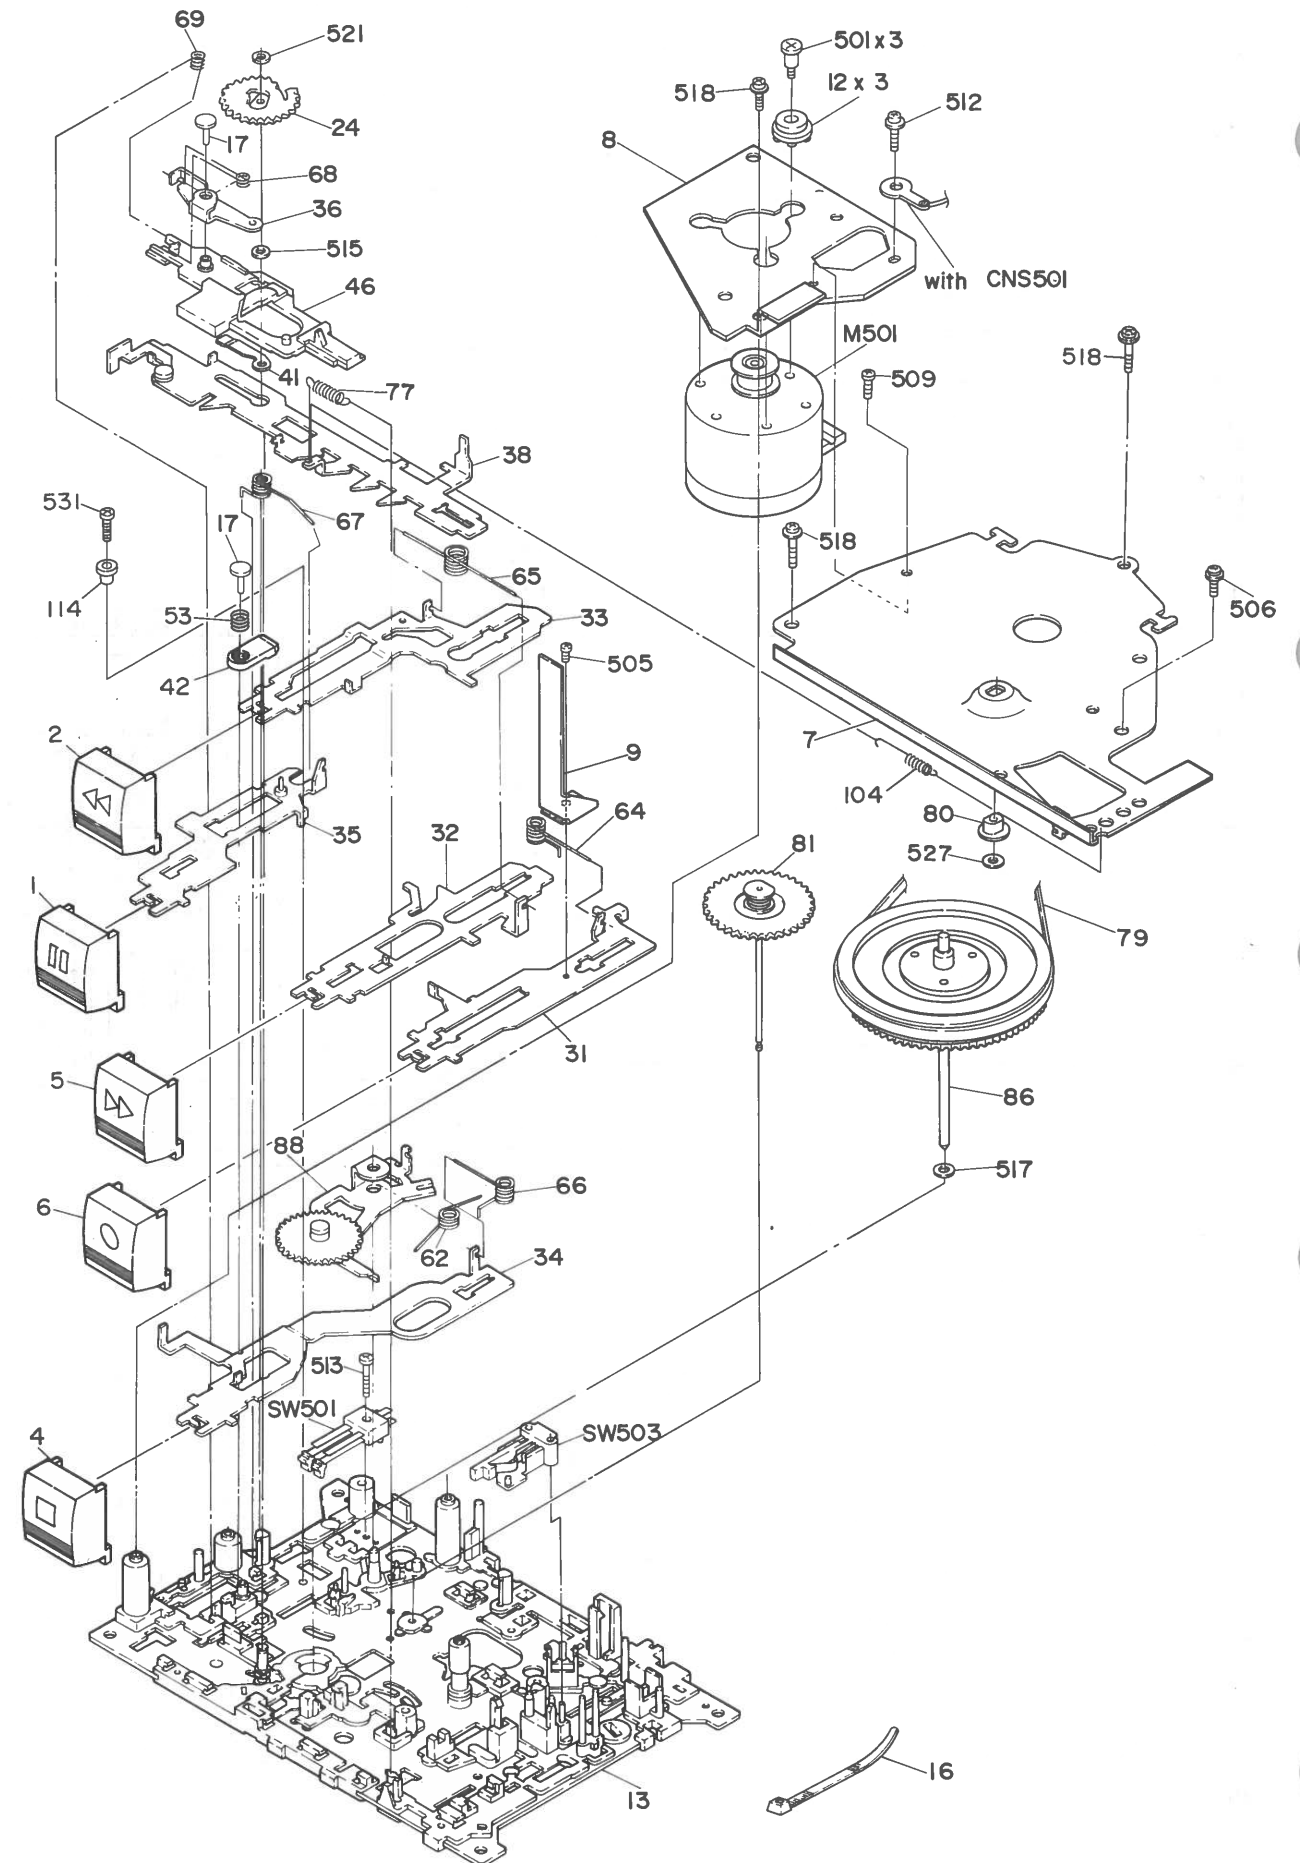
TAPE MECHANISM EXPLODED VIEW (2/2)
